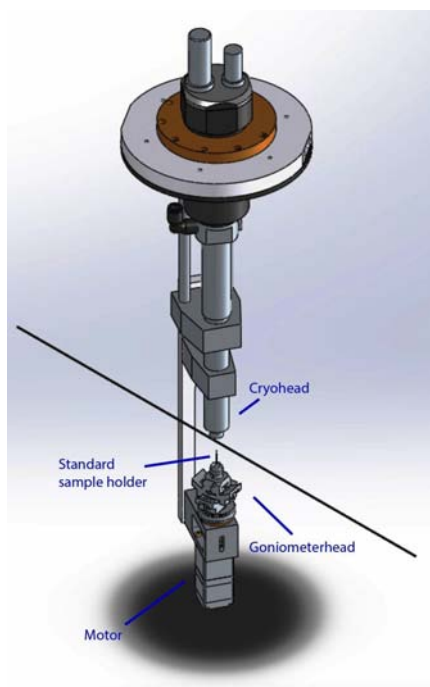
The customized sample holder for the insertion of the Cobra set-up cryohead in the LADI-III neutron diffractometer. The figure shows the aluminium support, the goniometerhead and a small motor which drives the sample rotation about the spindle axis positioned below the goniometer.
